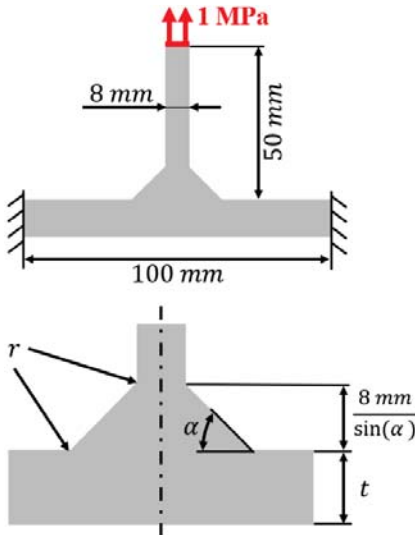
Loading condition and geometry parameters for the fillet weld geometry.
